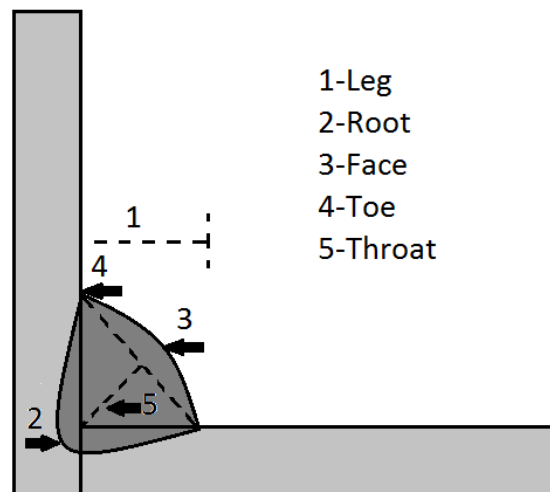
Fillet weld terminology By Powerstroker - Microsoft Paint, CC BY-SA 3.0,
